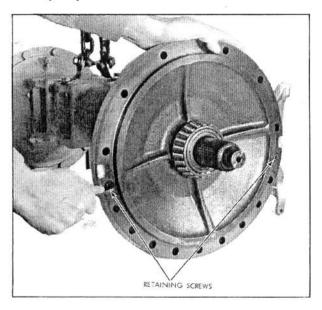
Carrier Plate Retaining Screw Removal or Installation
